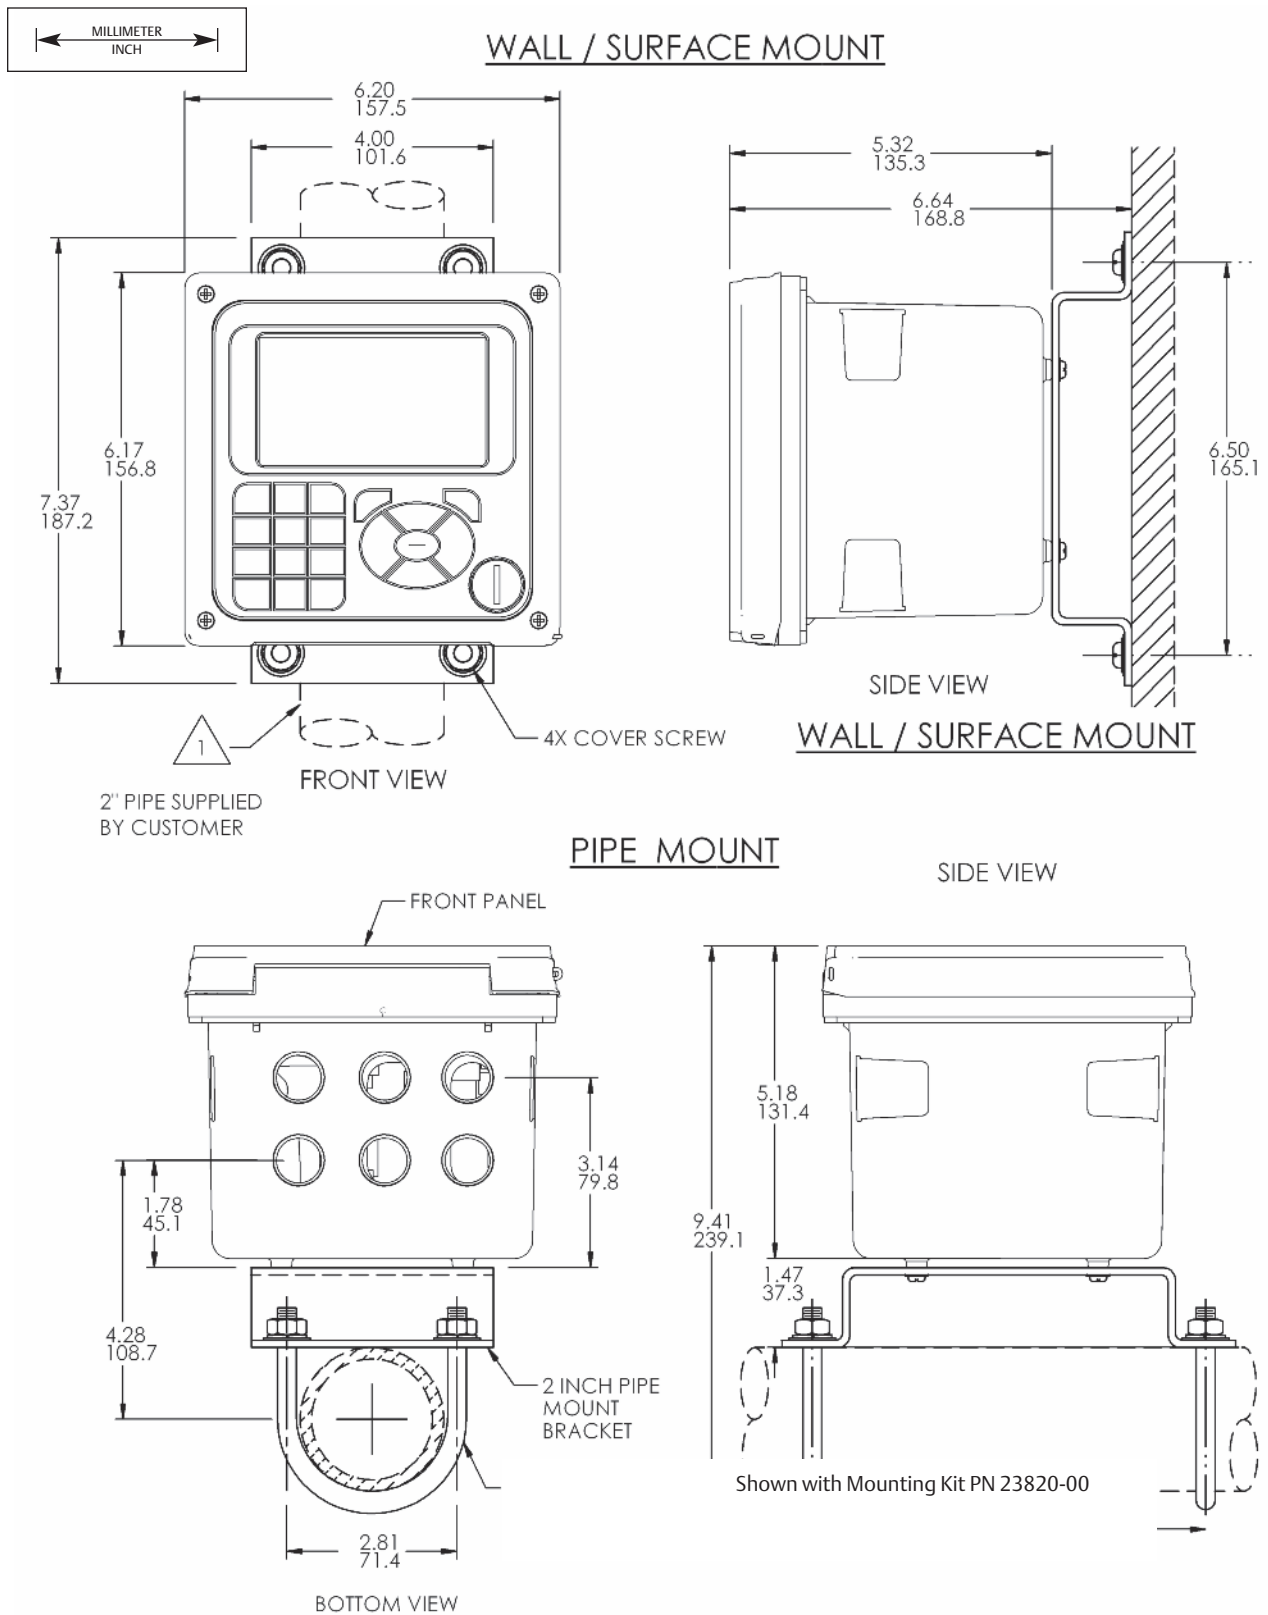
Pipe and Wall Mounting Installation dimensions
